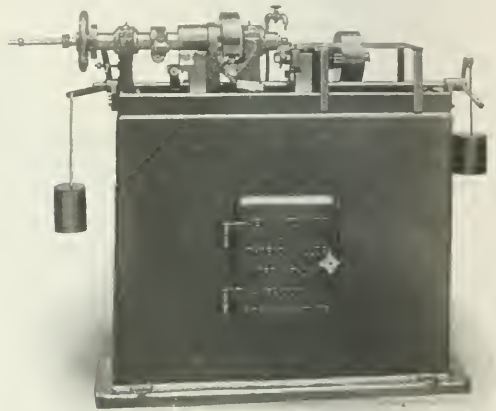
Semi-automatic Machine for milling Threads on Ends of Rifle Barrels
